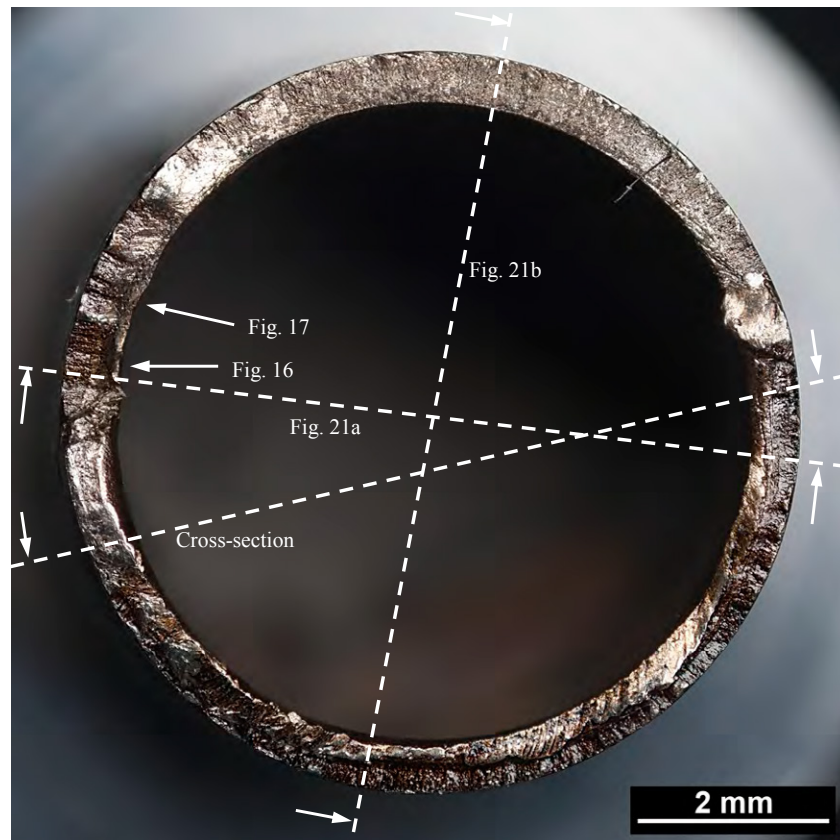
Fractograph of fracture surface {1,1}
